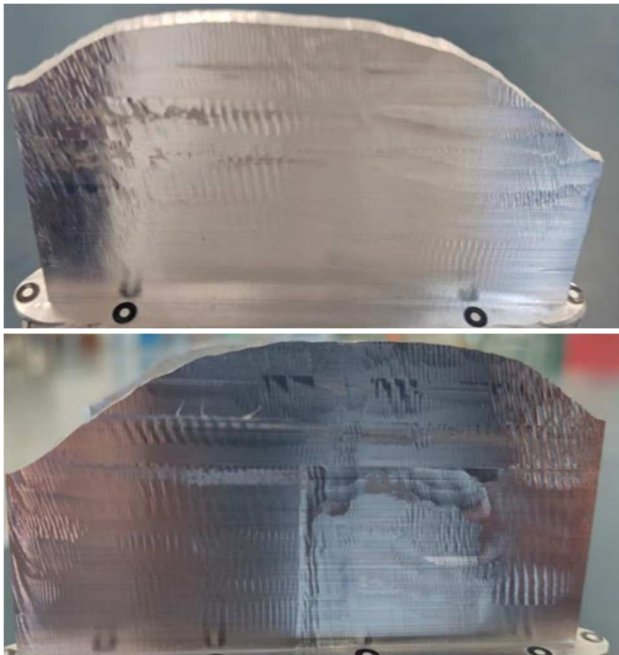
Thin-walled part after milling by end mill with helix angle 35°
